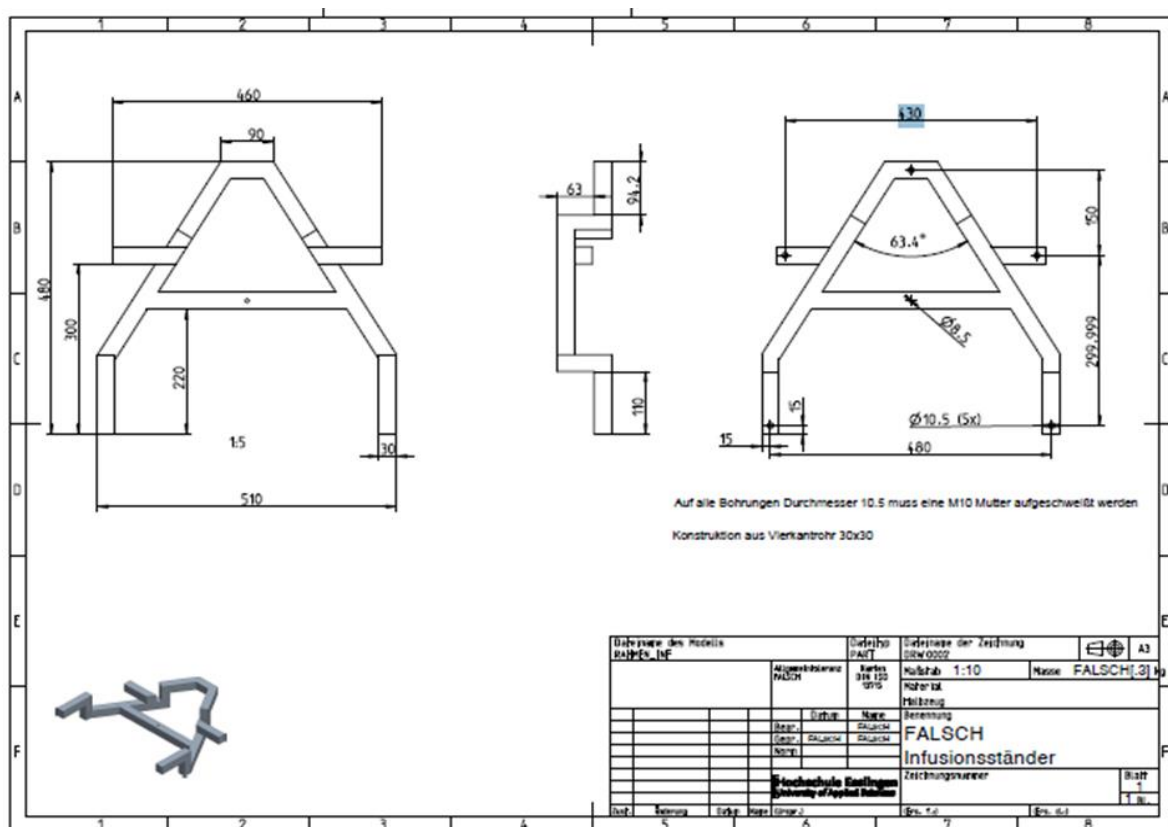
Engineering drawing A-shape chassis (CARCaSy, 2022)
